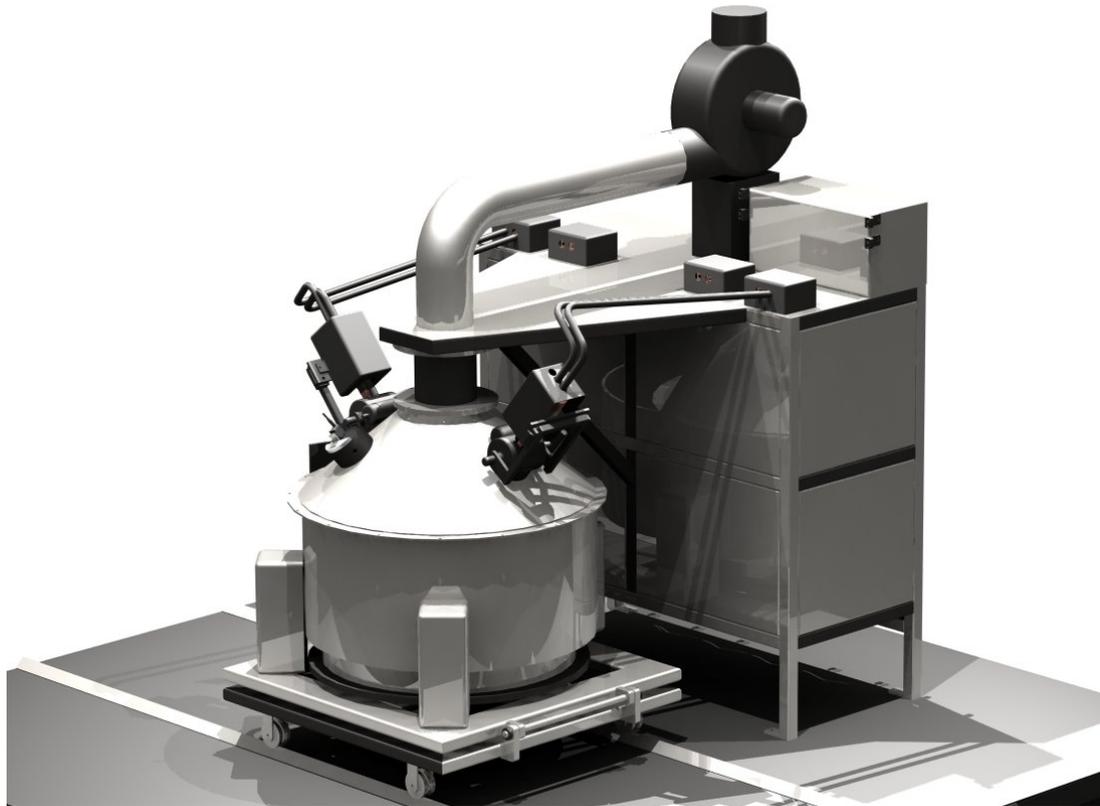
Solidworks® Drawing of Plasma Arc Melter
